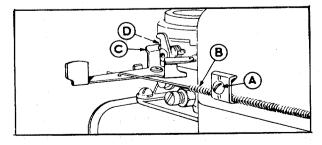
THROTTLE CONTROL ADJUSTMENT
